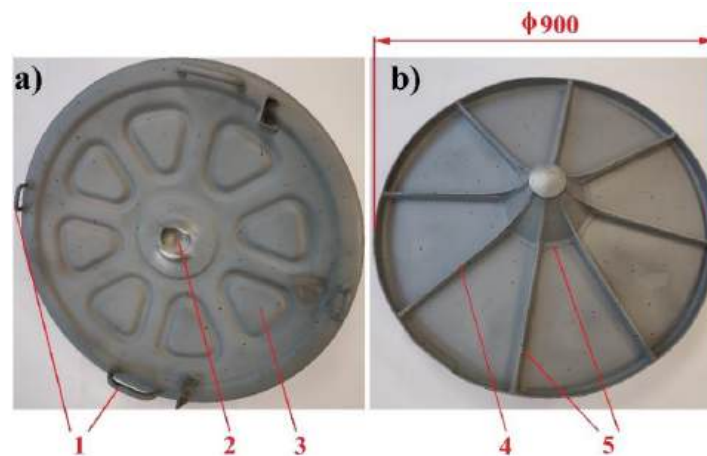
Mortar base plate: a) – view from above, b) – view from below, consisting of: 1 – transport handles, 2 – ball socket, 3 – stiffening embossments, 4 – strengthening ribs, 5 – welded joints.
